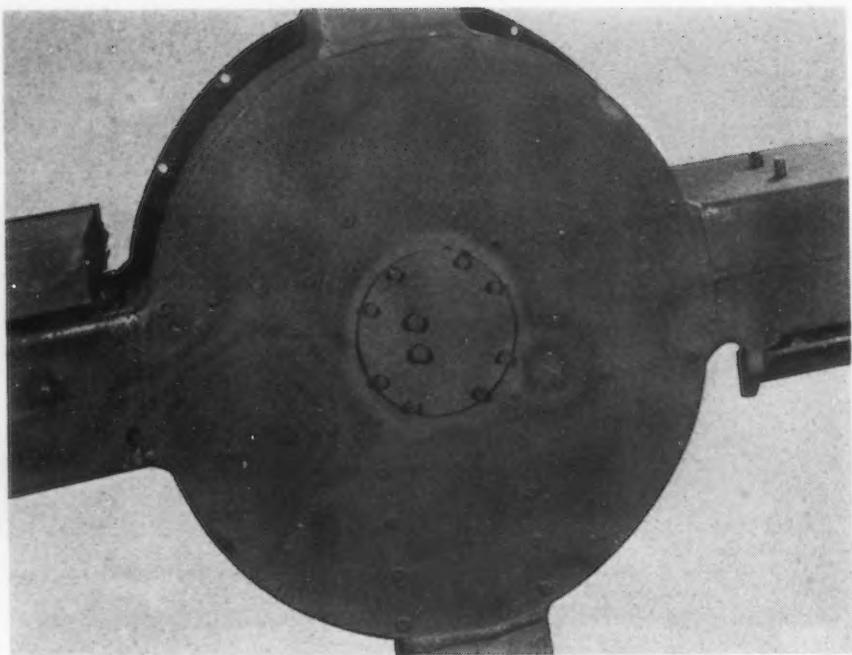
A bottom view showing the welded construction used in the fabrication of the welded tub.
